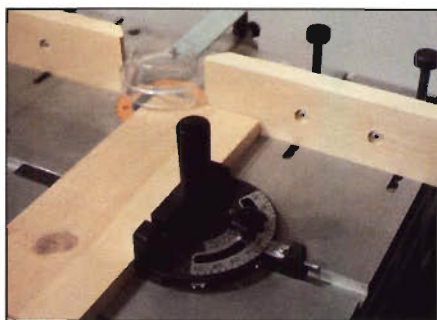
Photo E: Some operations, such as shaping board ends, call for a miter gauge. The tractor-type gauge provided with the Rebel is one of the best I've encountered on any woodworking machine.
